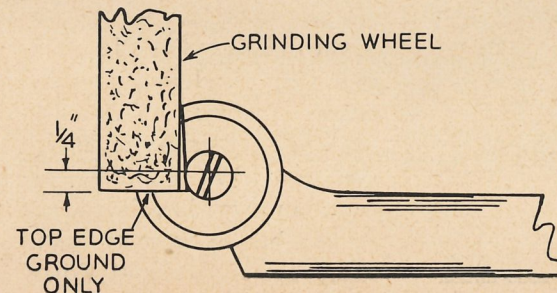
Proper method of grinding the threading tool shown in Figure 22. The side faces are never ground.
